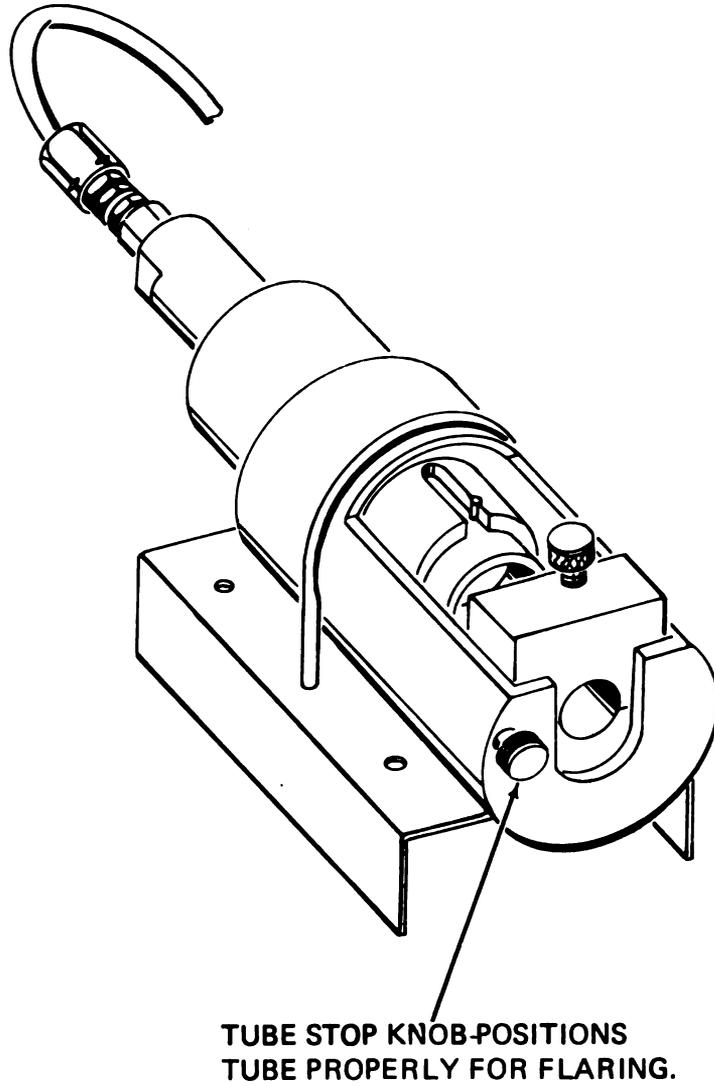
Tube Flaring Tool Tube Stop Knob.
